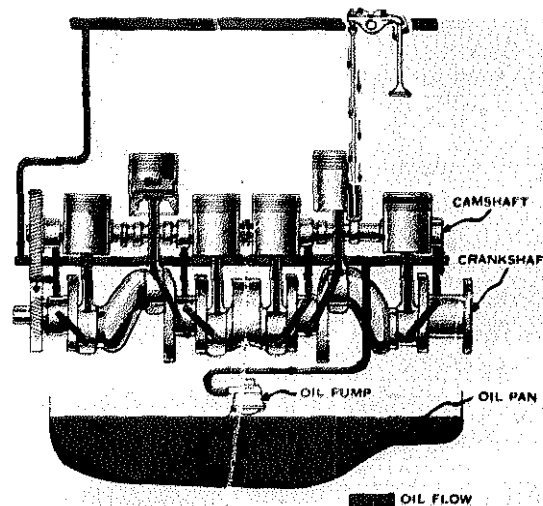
A simplified schematic drawing showing an oil pressure system. The oil is forced, as indicated in the drawing, by a pump to the critical points in the engine, such as the crankshaft and connecting rod bearings, the pistons, and the valves. The parts of the engine not receiving oil under pressure obtain it through a "splash" system.
